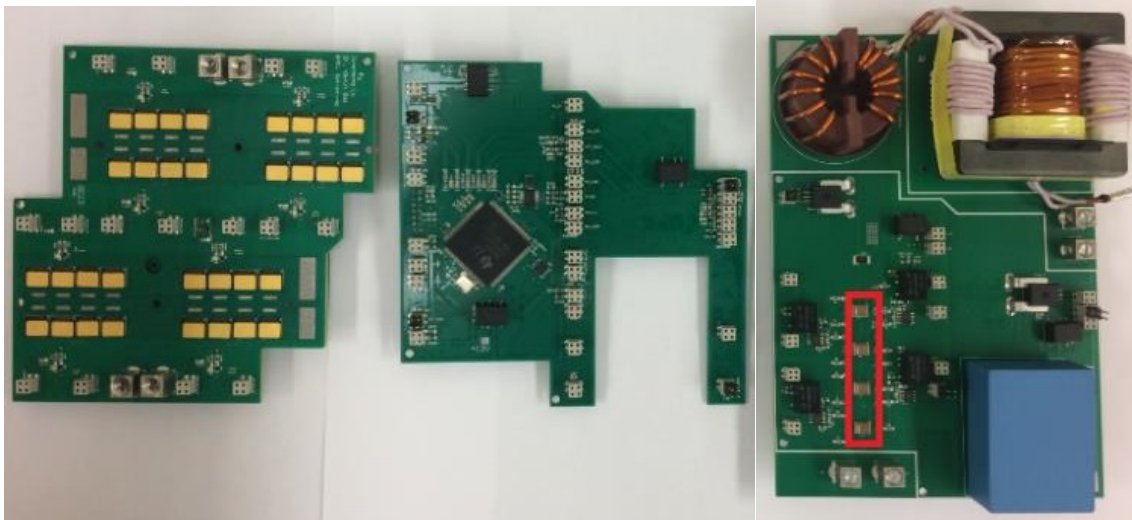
PCBs of the Whole Charger (from left to right: GaN HEMT PCB, control PCB and rectifier PCB)
